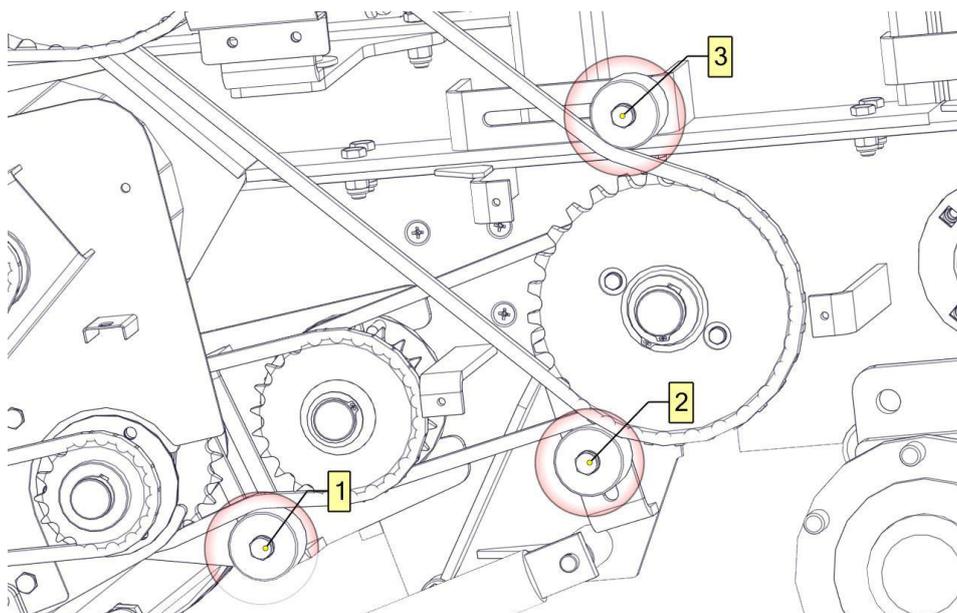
Adjusting the chain tension on the left-hand side of the baler
